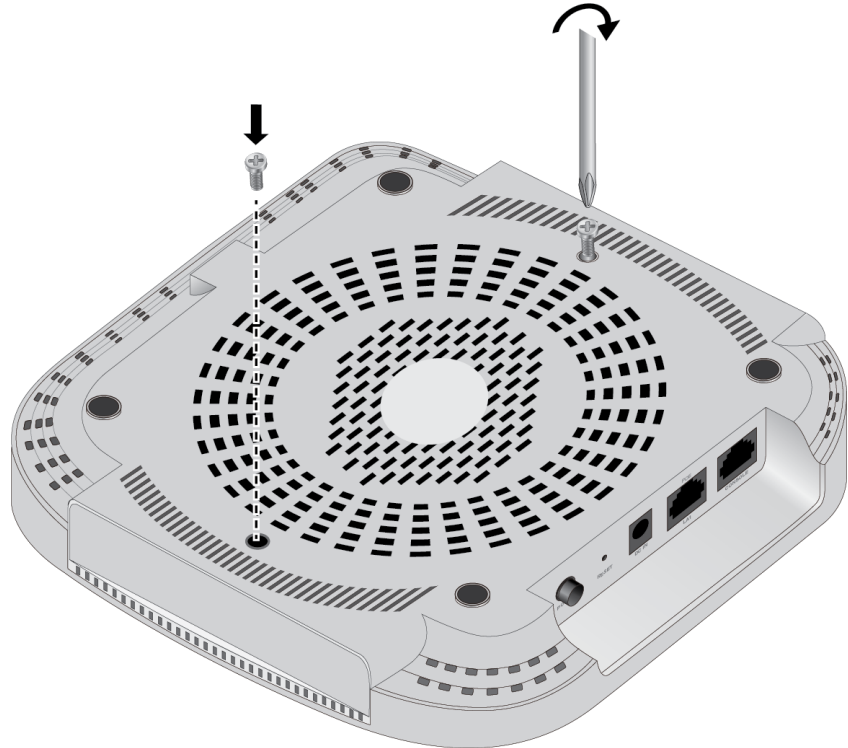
Attaching the Bracket Screws to Wireless Access Point
